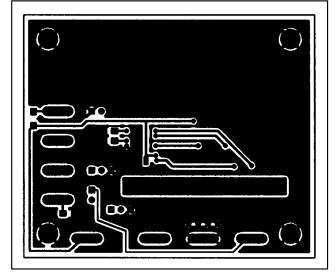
MAX797 EV Kit PC Board Layout—Solder Side
